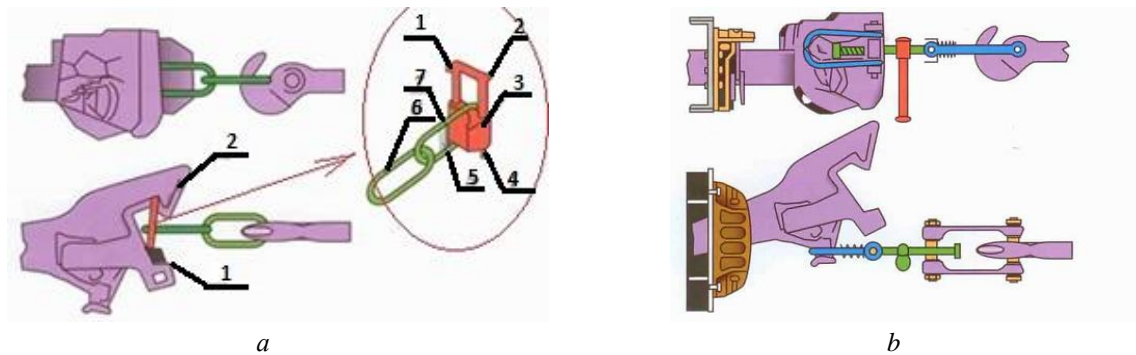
Adapter devices and variants of connecting an automatic coupler to a screw coupling with using an adapter (a) or using a special seal on the coupler body (b) [18]: Adapter (highlighted): 1 – small knuckle (SA-3); 2 – large knuckle (SA-3). Adapter components: 1,2 – adapter cross-bars; 3 – lock housing (adapter body); 4,5 – lock guides; 6,7 – two rings.
